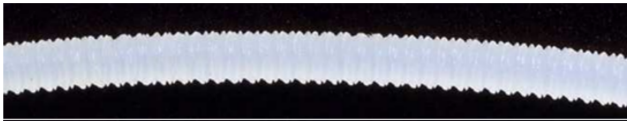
Picture of sharkskin developed on a polyethylene fiber after extrusion through a capillary die attached to a single screw extruder.
